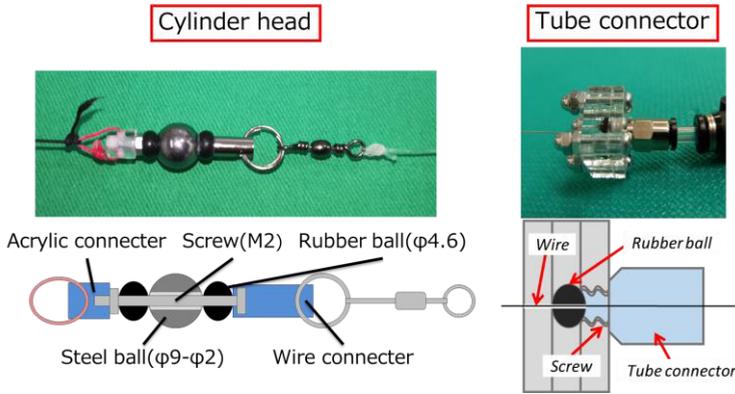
Cylinder head with the wire and inner schematic diagram of the tube end connector.
